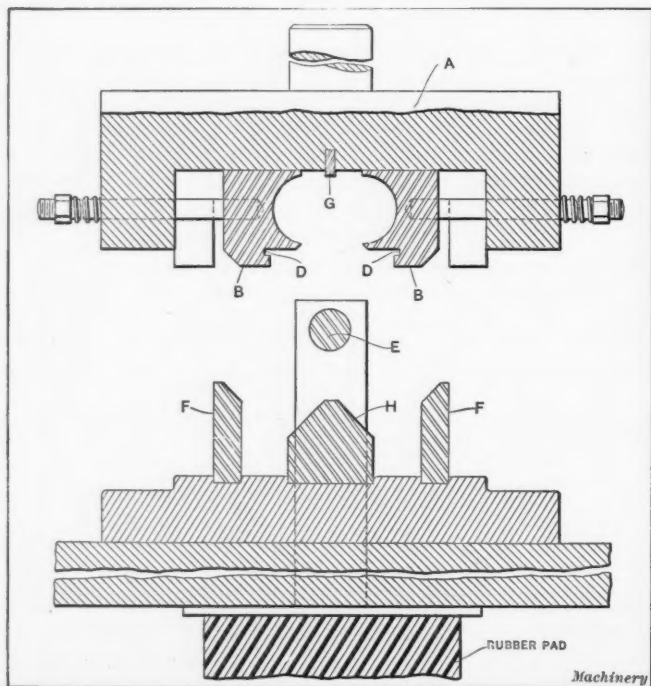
Sectional Diagrammatic View showing Construction of Tube Forming Punches and Dies
